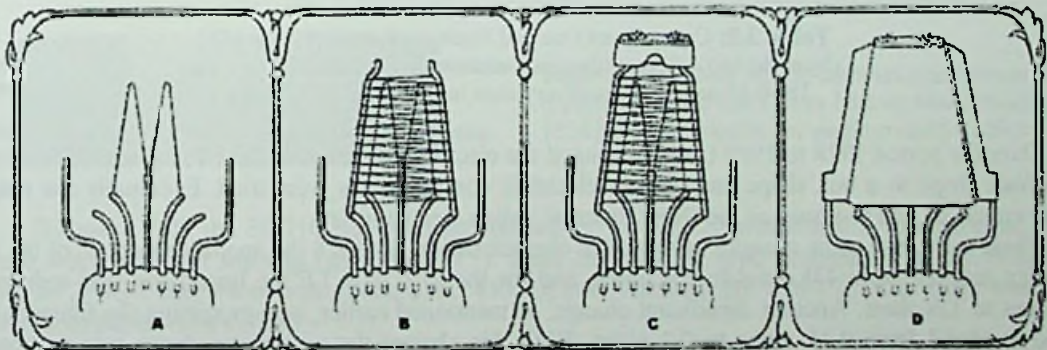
Electrode structure of the six-volt Point One Series. (A) shows the double inverted V-shaped filament, (B) the grid winding, (C) the sconeite insulator with spring tensioning for the two arms of the filament, and (D) the final anode assembly.
